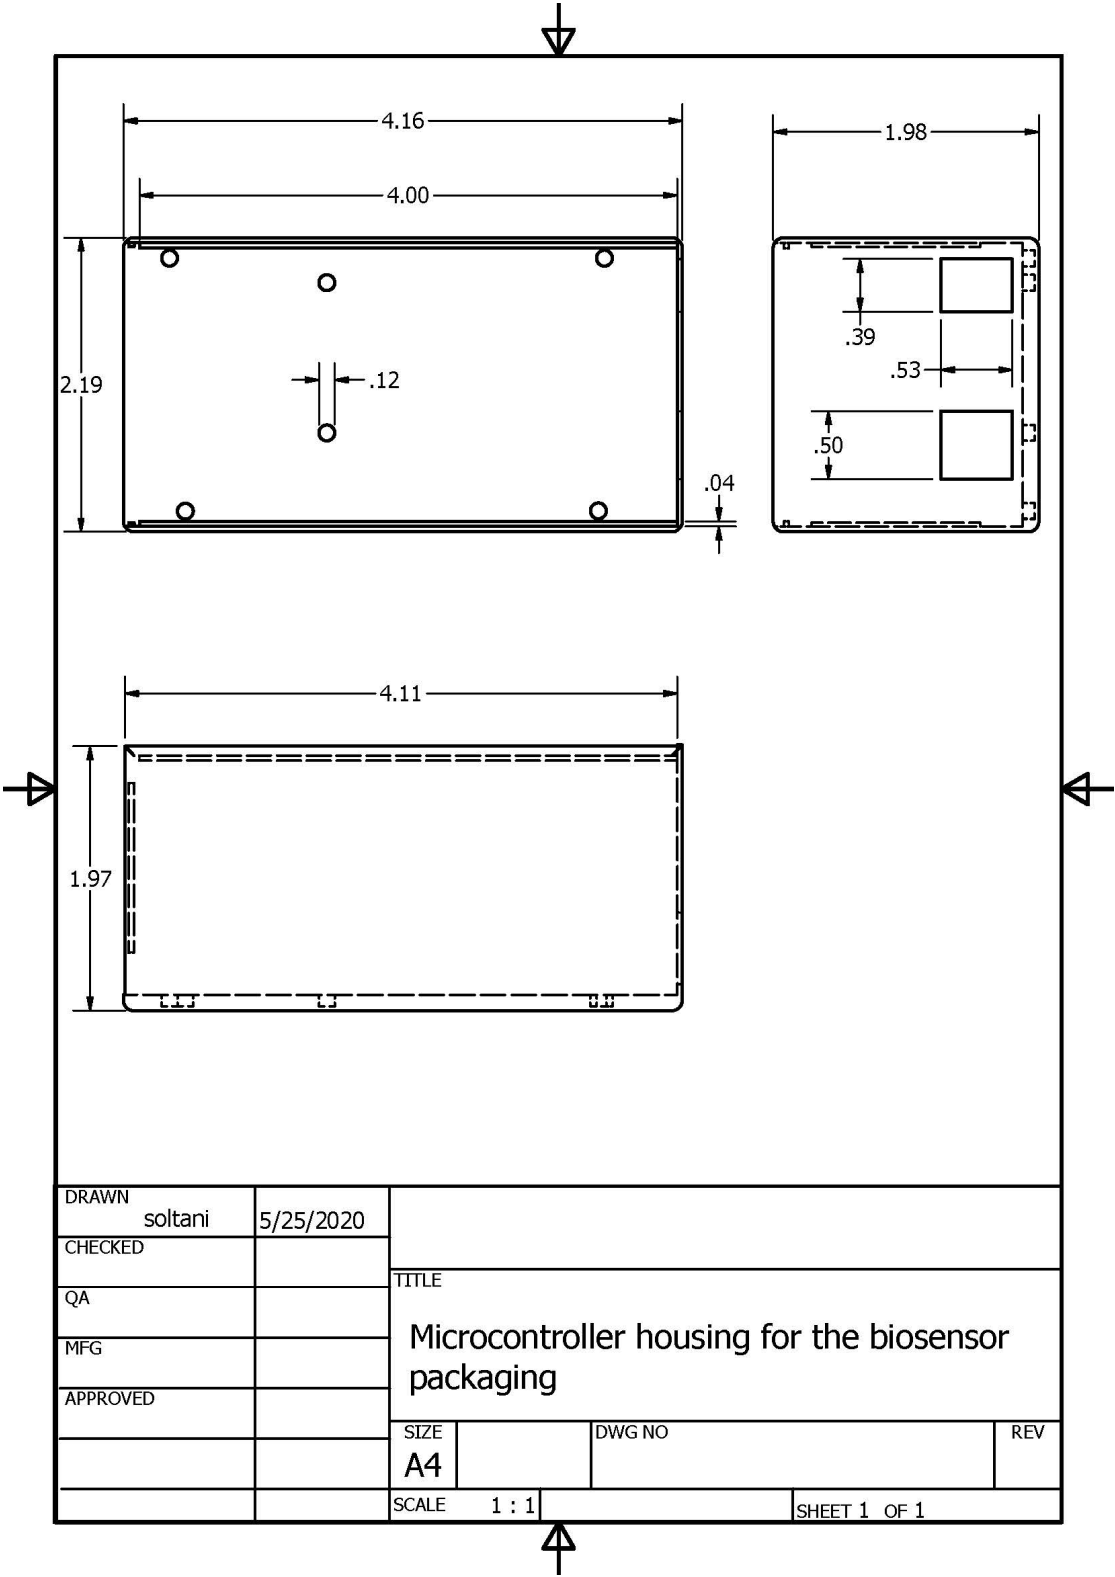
Technical drawing for the microcontroller housing, illustrated in Fig. 3.9.
